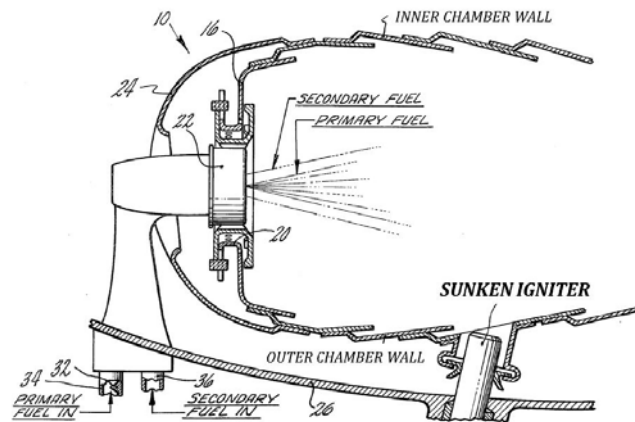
Location of a surface discharge igniter ("Sunken igniter") inside the combustor [123]
